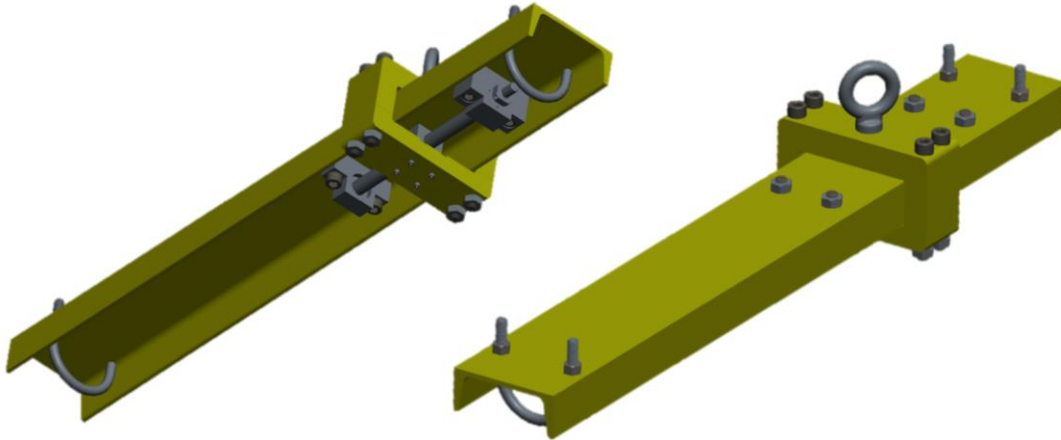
CAD drawing of the proposed adjustable lifting bar, utilizing a power screw
